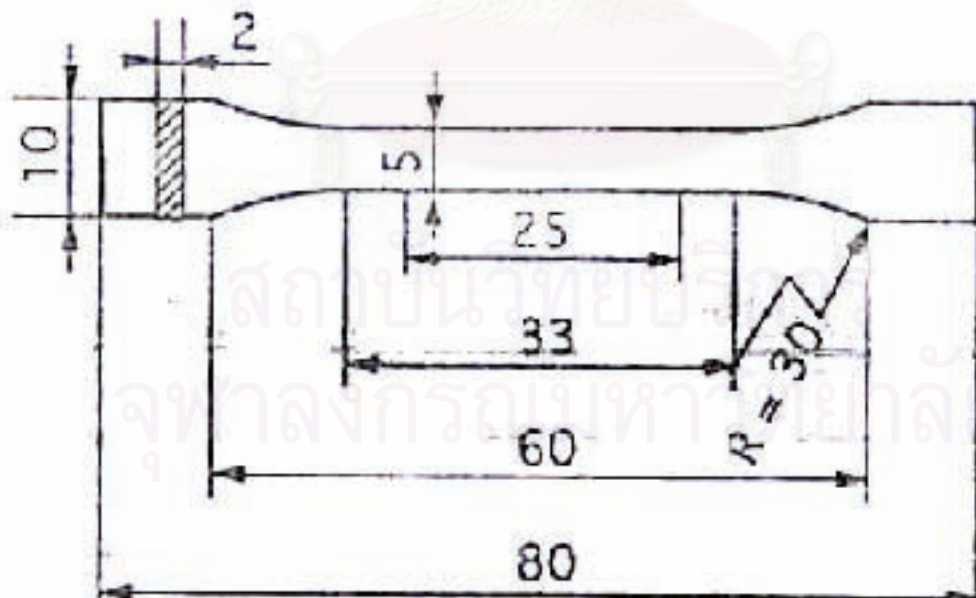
Dimensions of milled tensile bar in mm [16].
